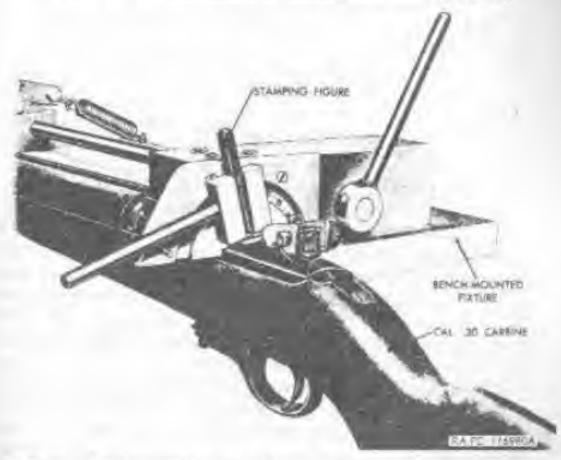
Placement of burrel and receiver assembly in vise-held stamping fixture,
